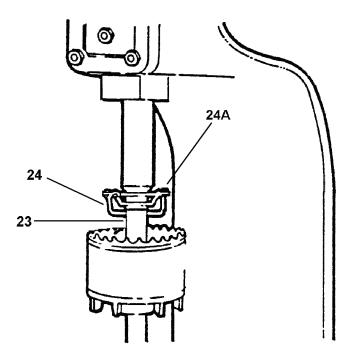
Pressing Actuator Onto Shaft in Arbor Press.
